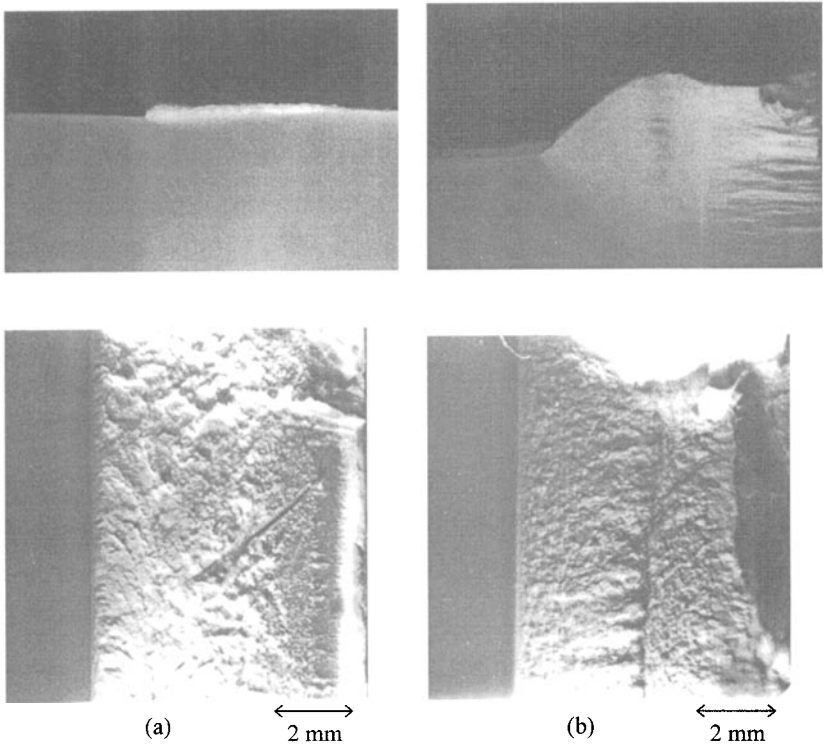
Optical microphotographs of transversal cut surfaces and fracture surfaces for specimens loaded onto stress level (a) 3.5 MPa, (b) 4.5 MPa
